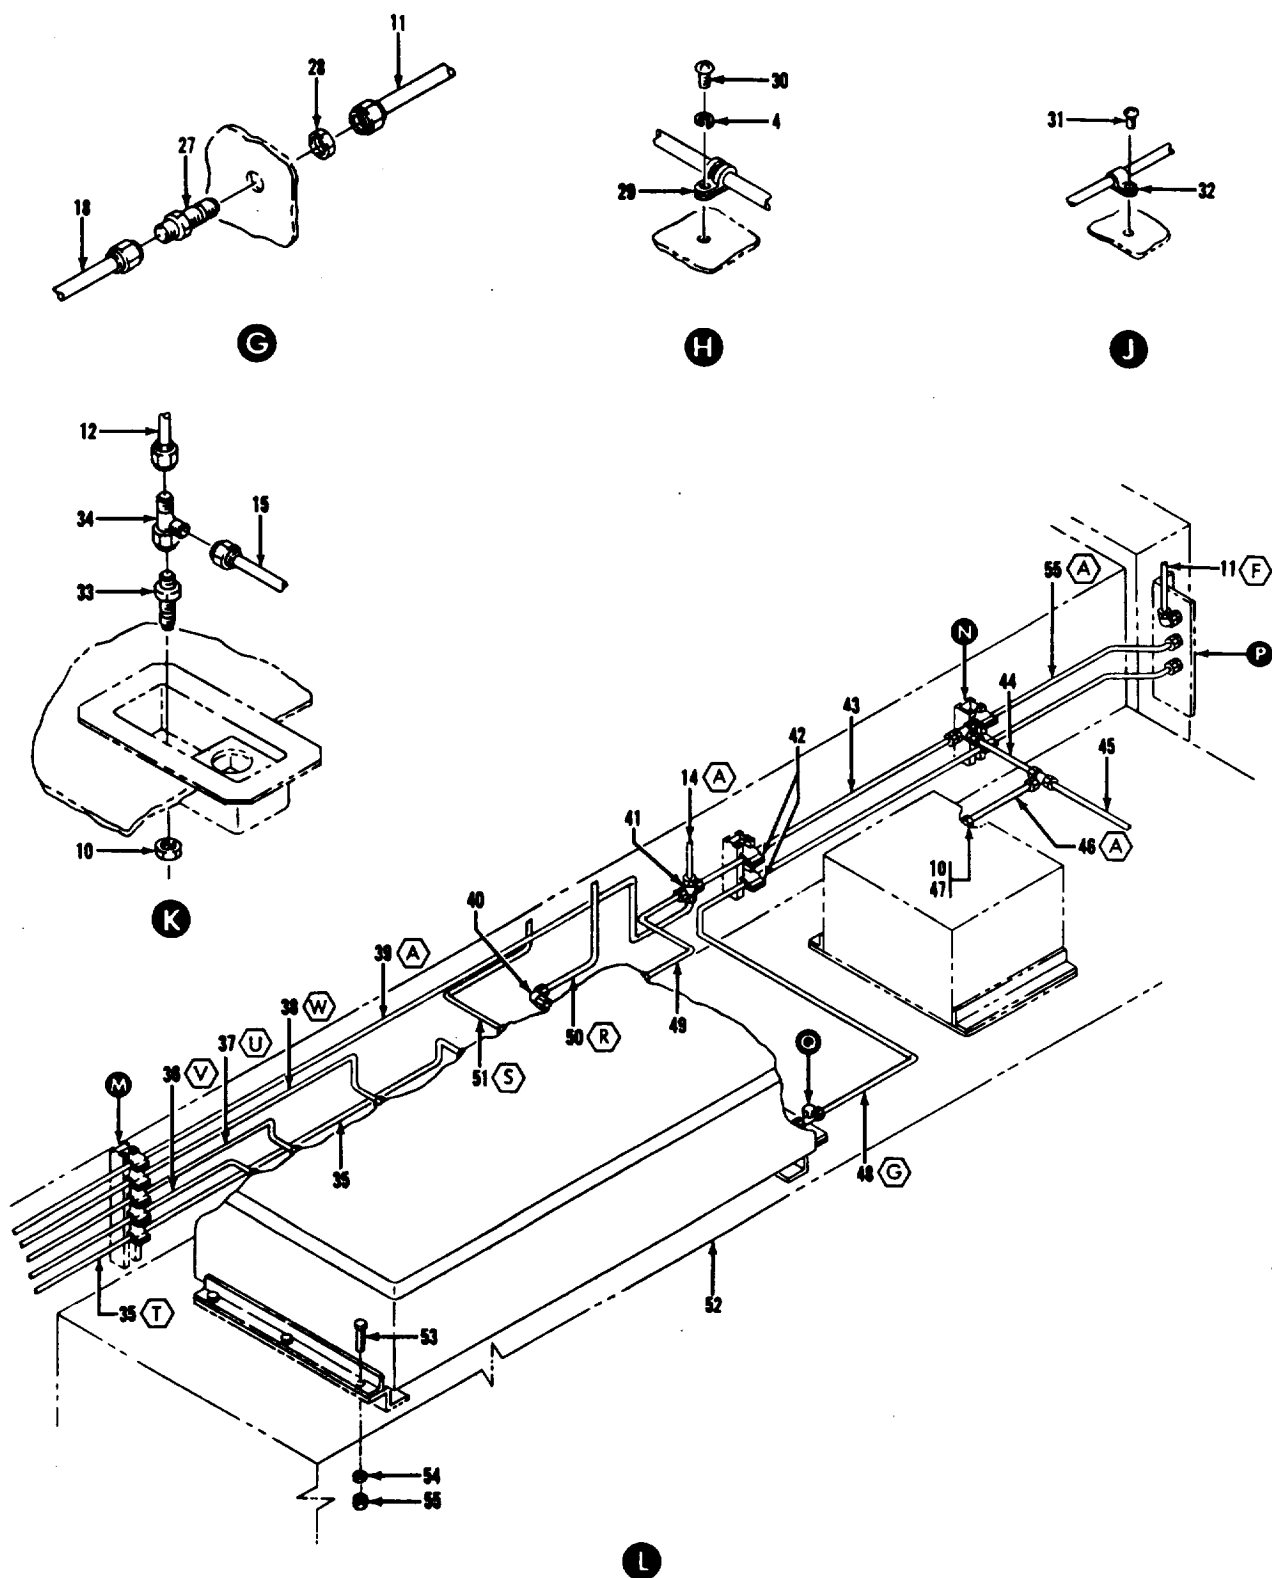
Tubing Installation (Sheet 4 of 17)
